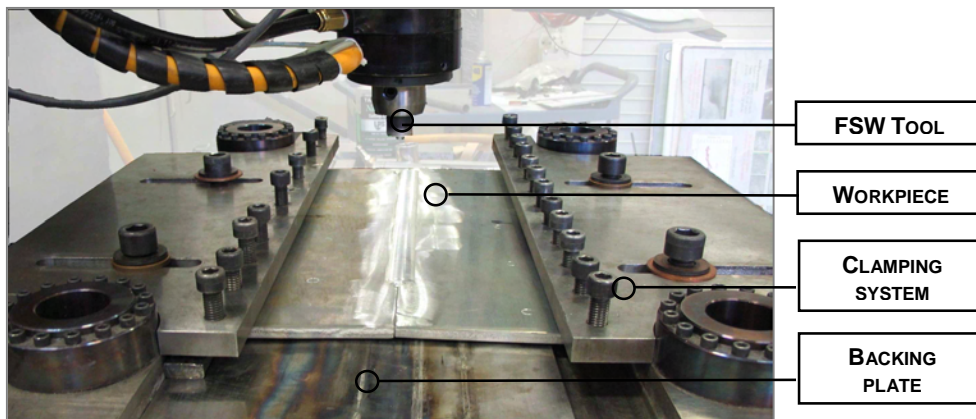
A view of the FSW machine after a typical line welding.
